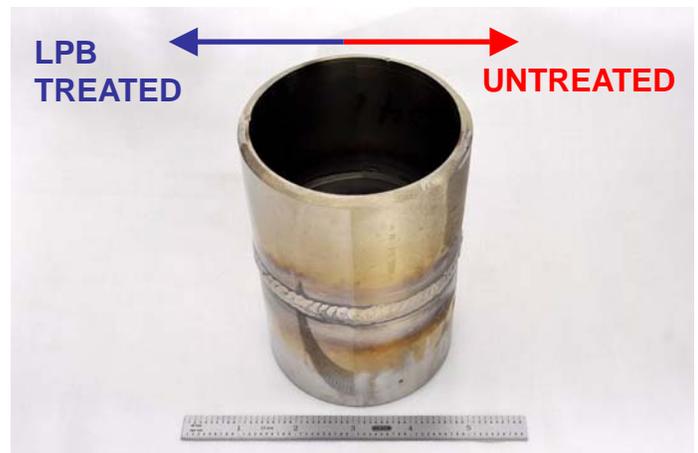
316LSS welded pipe specimen; half LPB processed
